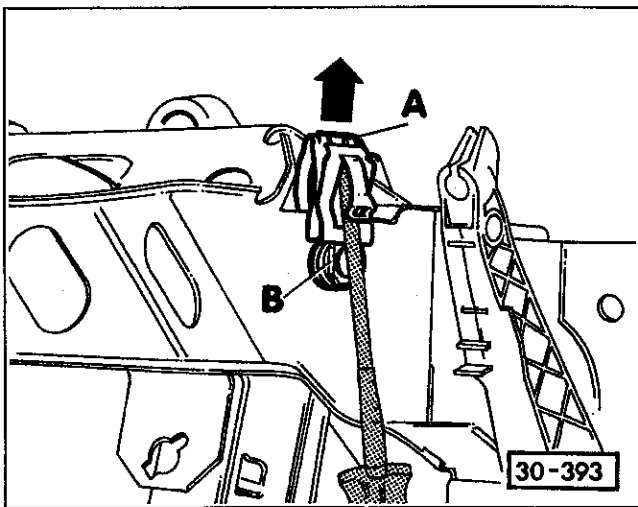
Remove pedal shaft clip (A) by prying up and off (direction of arrow). When installing clip, flats on shaft (B) must be vertical.
